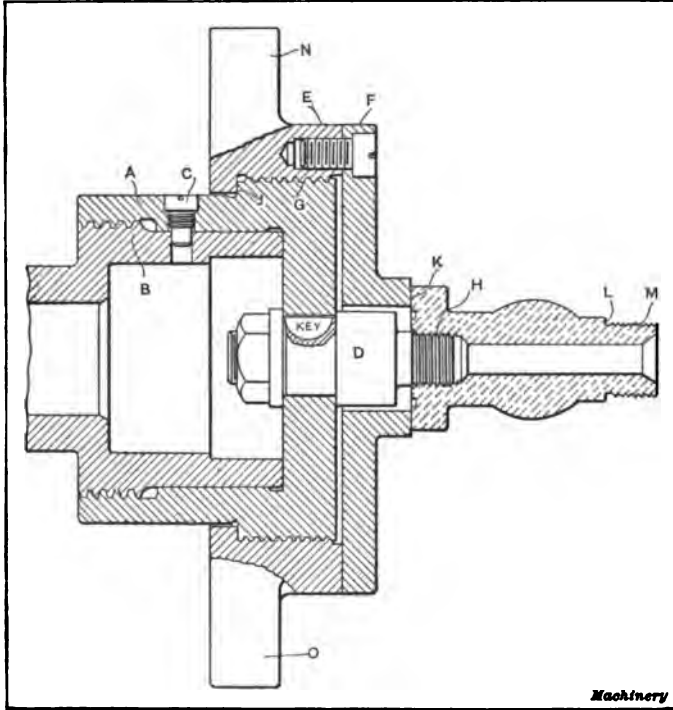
Arbor for Machining Valve Body shown in Fig. 16
